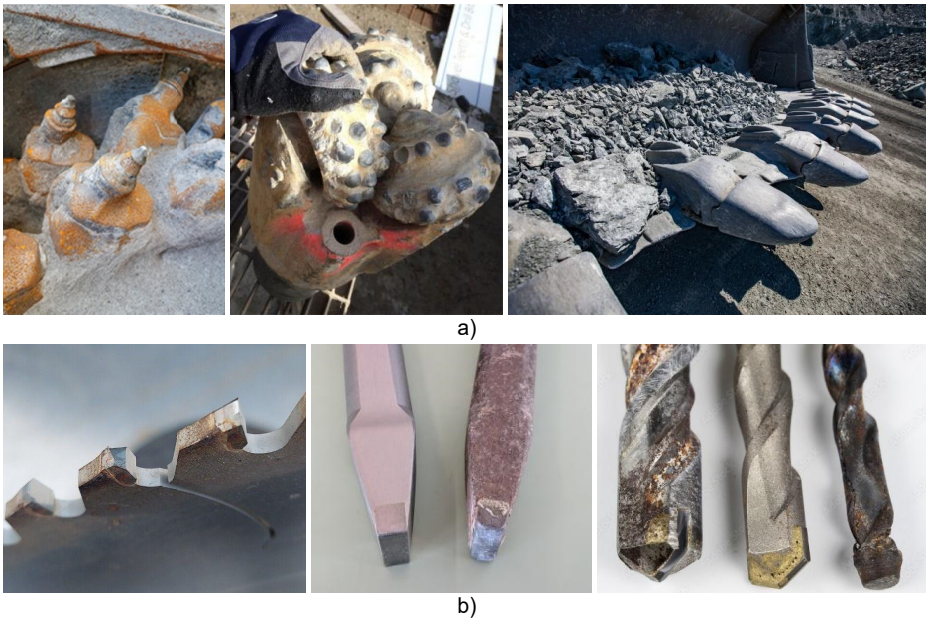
Examples of wear on: a) working elements of extraction machinery, b) processing tools [23-26]
